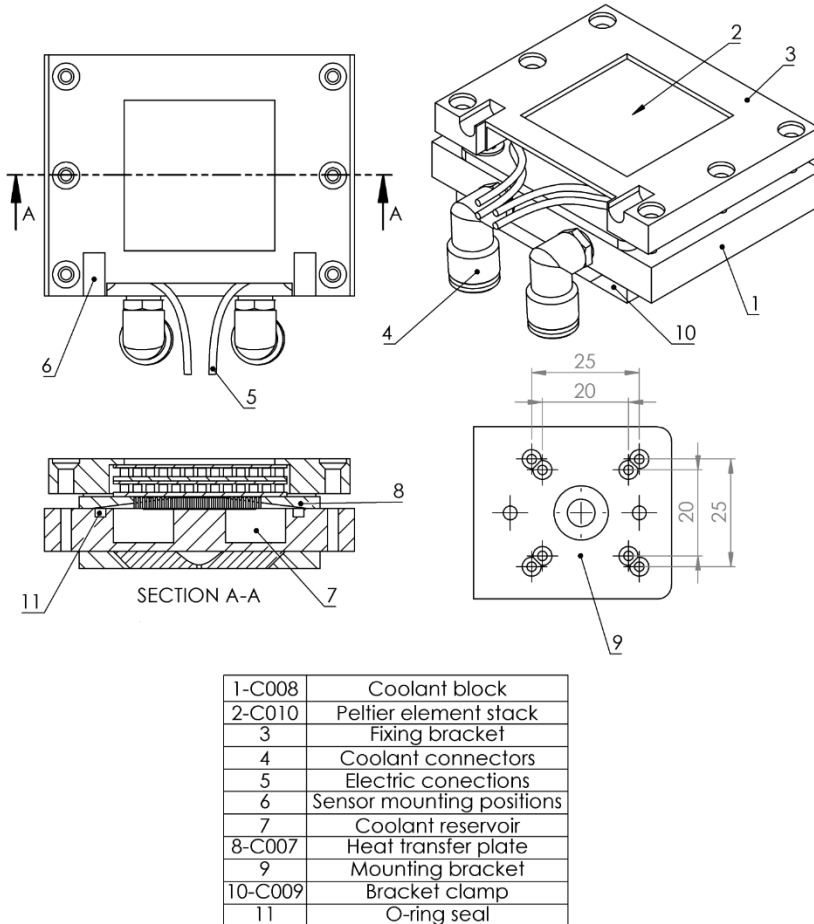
Annotated CAD rendering of the TEC block. Technical drawings for each part of the TEC unit can be found in the appendix (section A.2).
